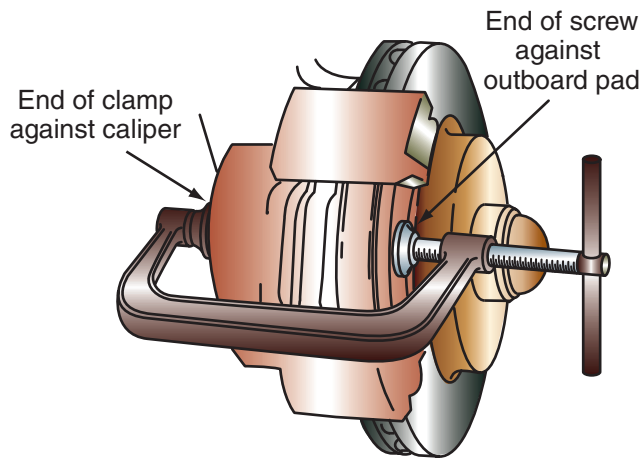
Use a C-clamp to retract the piston into the bore of the caliper.
